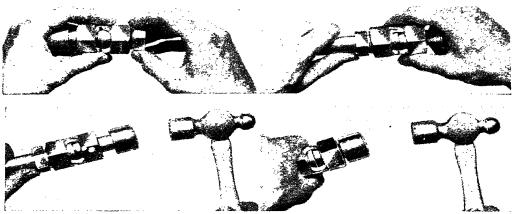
Hammer flaring tool. (Courtesy of Parker Appliance Co.)
